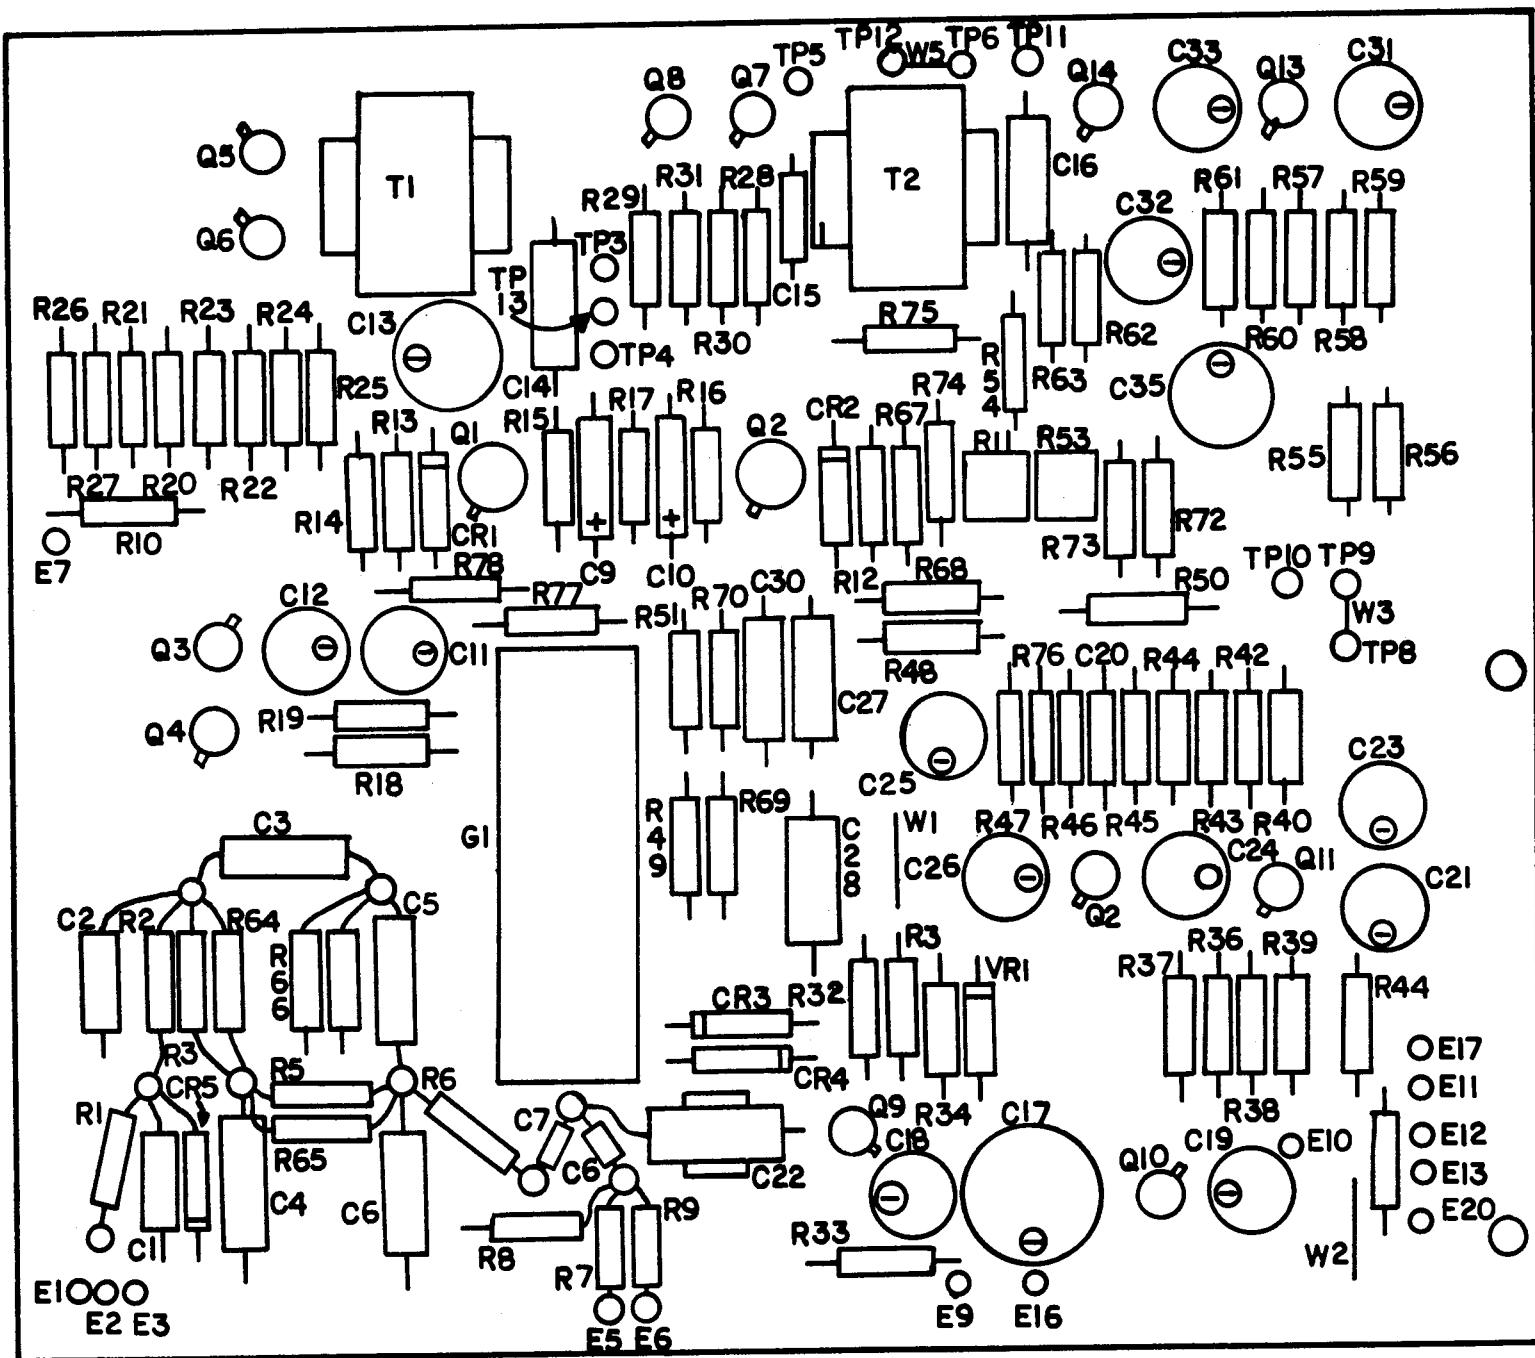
Amplifier Board Assembly (Sheet 1 of 2).
